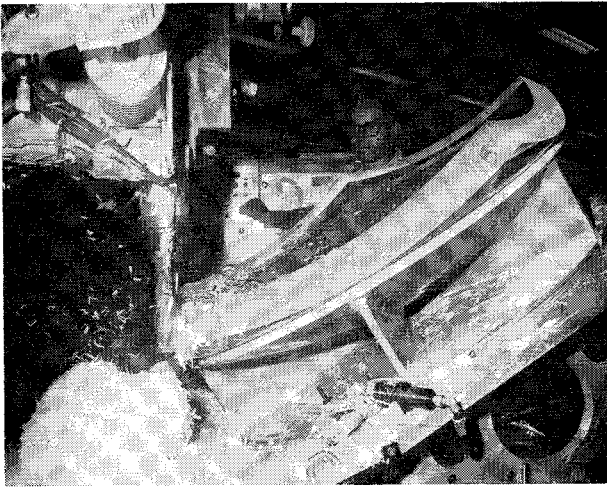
Machining acrylic pentagon for 5.5-ft-diam capsule.
